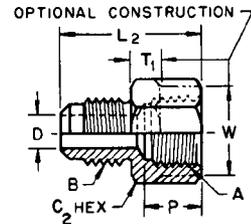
INTERNAL PIPE THREAD CONNECTOR (HALF UNION)
